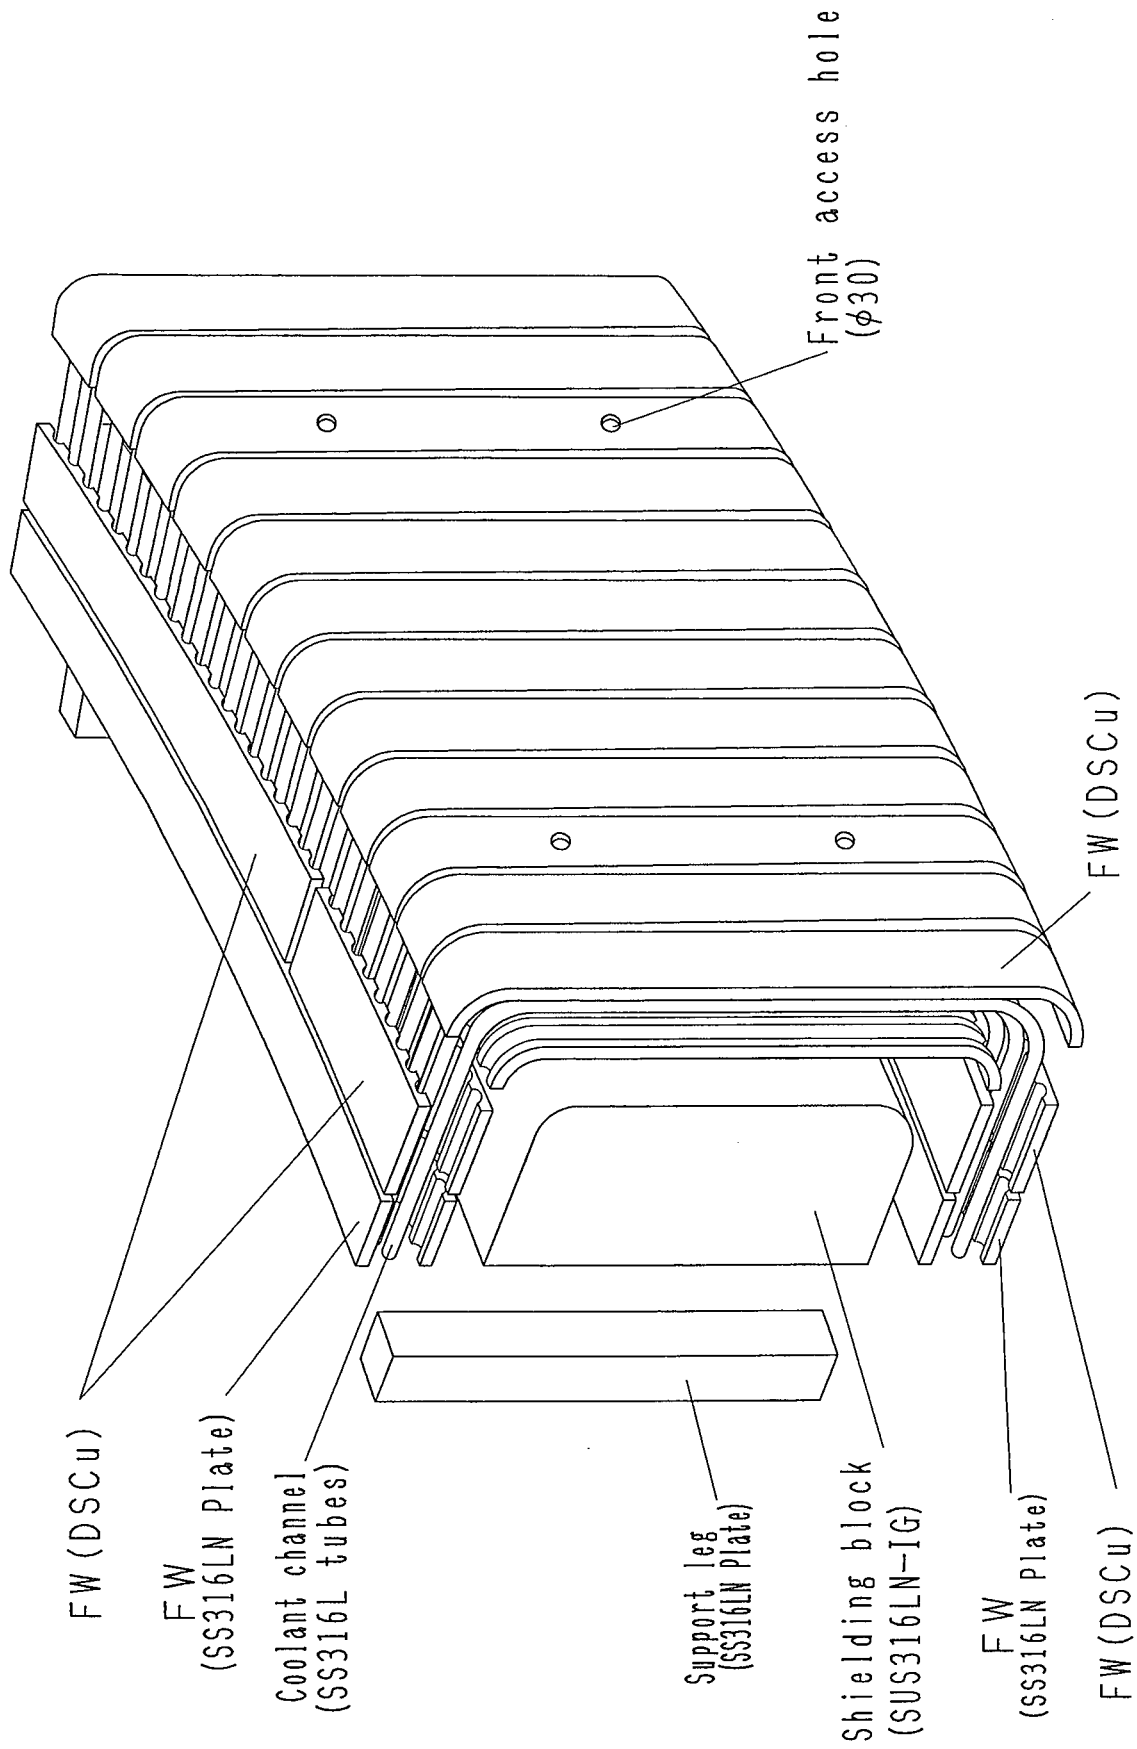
A concept of a single-step HIP joining of the shield block with the first wall.
